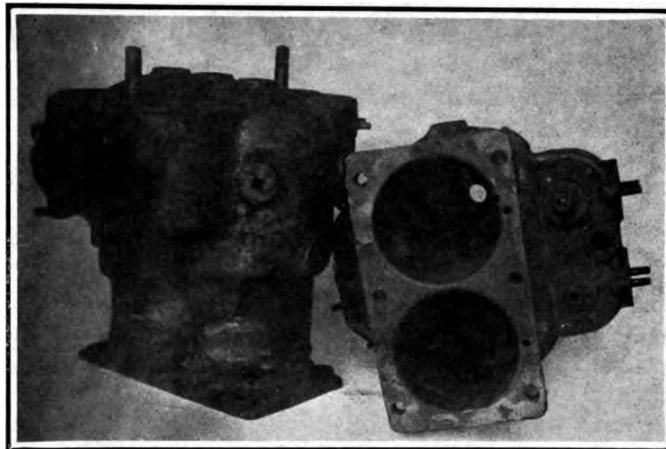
BROKEN PIECES WELDED IN PLACE
